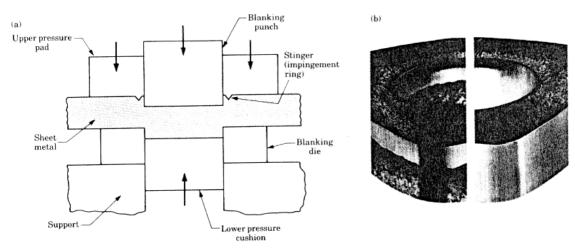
(a) Schematic illustration of set-up for fine blanking. (b) Comparison of sheared surfaces by conventional (left), and fine-blanking (right) techniques. Clearances in fine blanking are on the order of 1% of the thickness of the sheet. Source: Courtesy of Feintool U.S. Operations.
